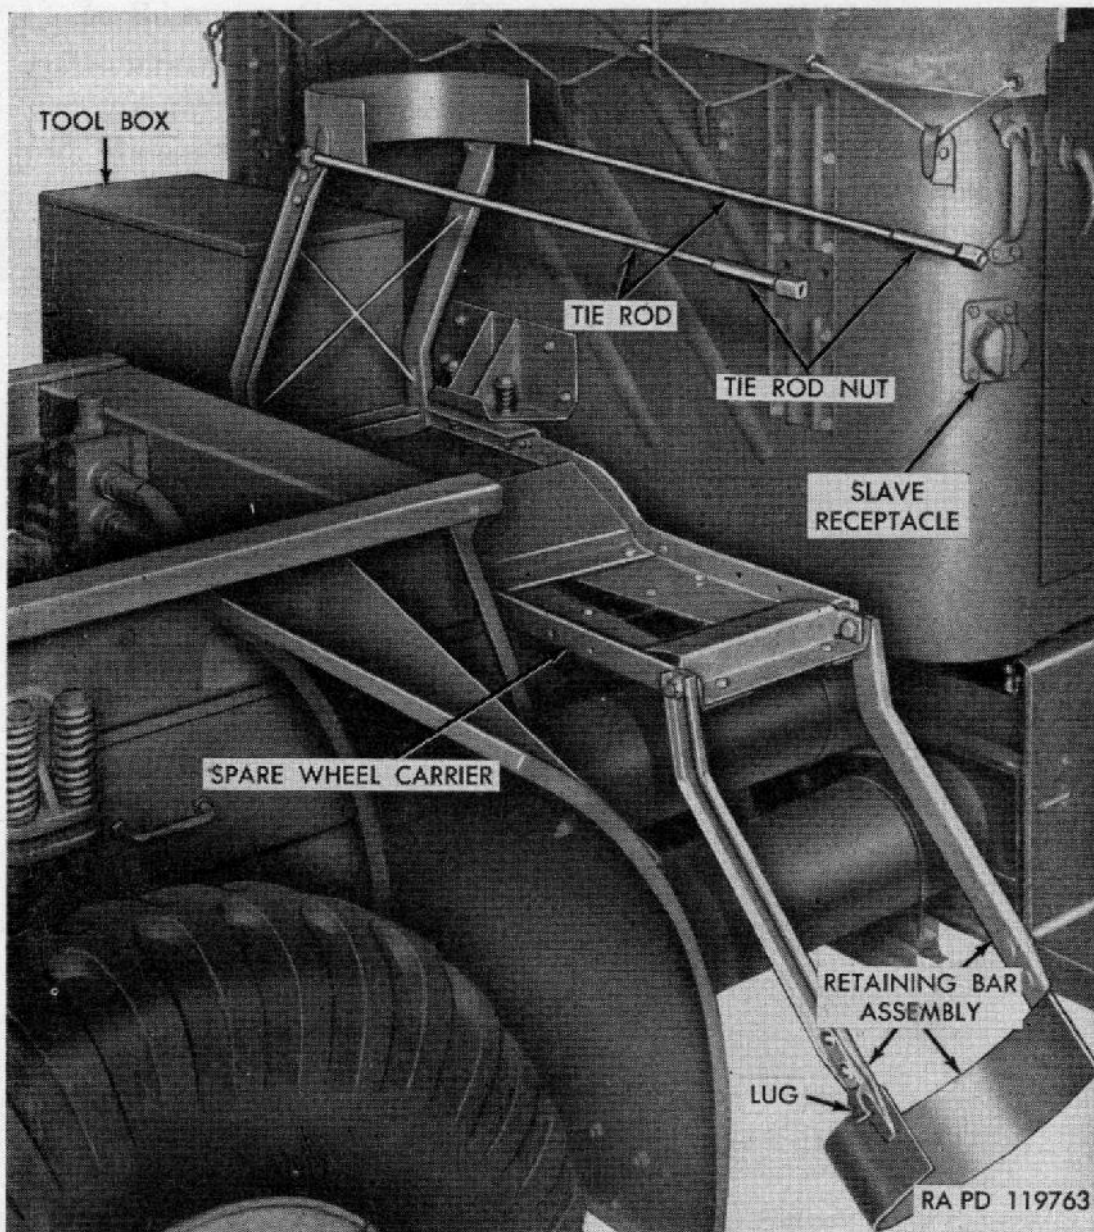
Spare wheel carrier—wheel removed—M47 and M59.
